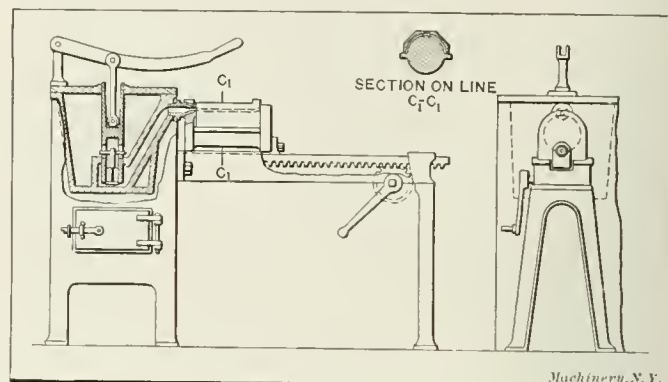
First Die-casting Machine built for Miscellaneous Work (1877) set up for Casting Bearings
